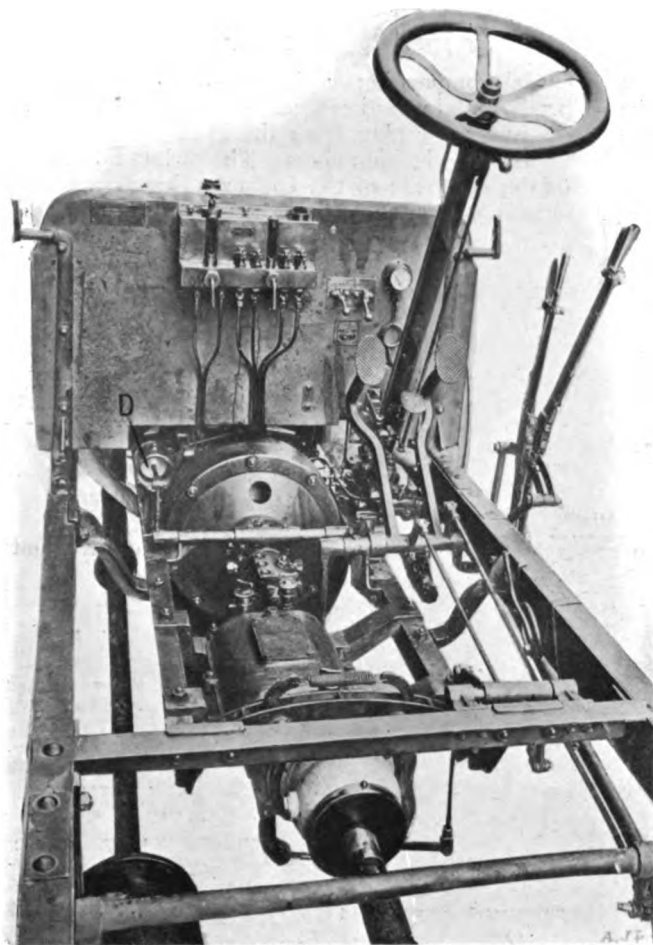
Rear view of the 20-24-h.p. Simms chassis, showing the dash-pot, D, which is inter-connected with the clutch-operating gear.
